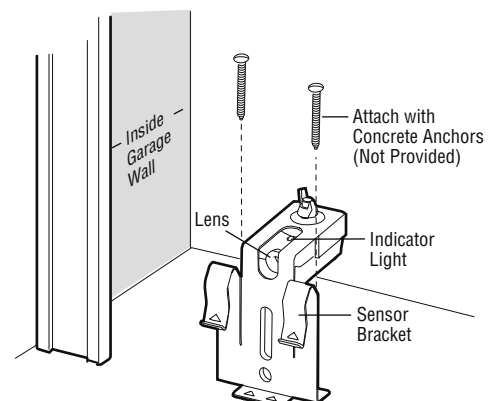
FLOOR MOUNT (RIGHT SIDE)
